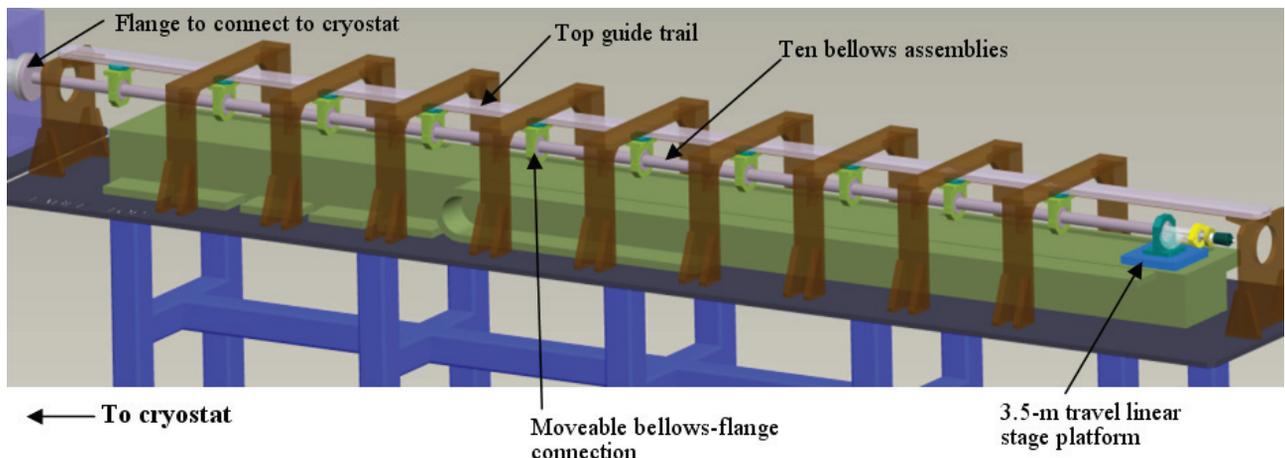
Linear stage. The stroke axial length of the bellows assemblies is 3.5 m. Details of the end section are shown in Fig. 4.
